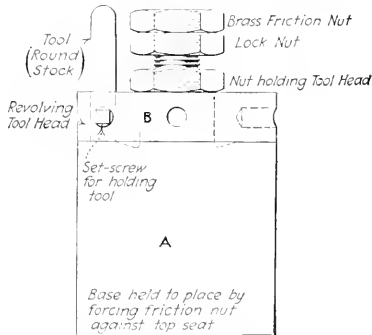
TOOL USED IN TRUING VALVE SEAT
